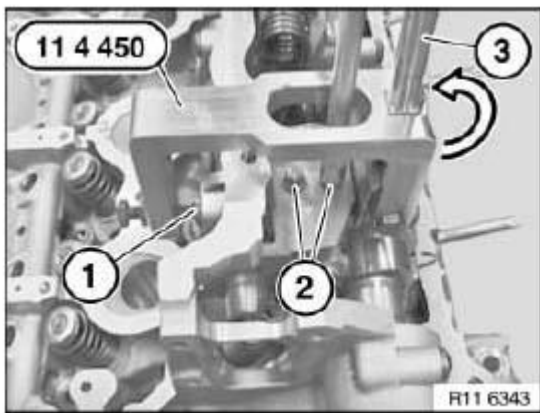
Identifying Special Tool (11 4 450), Eccentric Lever, Bolt And Bolt Connection
